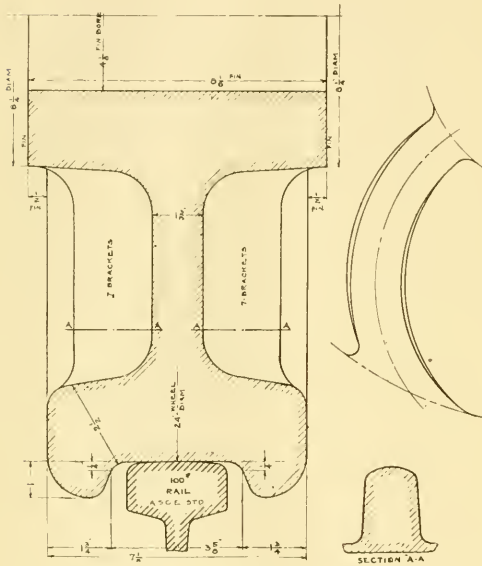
24 IN. 640 LB. DOUBLE FLANGE CHILLED IRON CRANE WHEEL, SINGLE-PLATE TYPE
